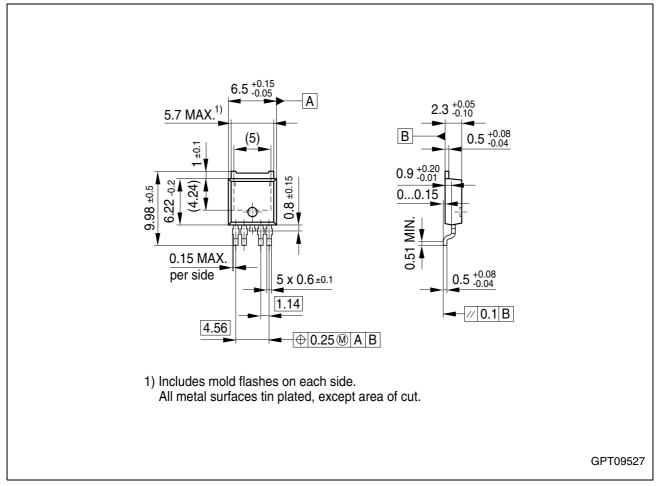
PG-TO252-5-11 (Plastic Transistor Single Outline)
